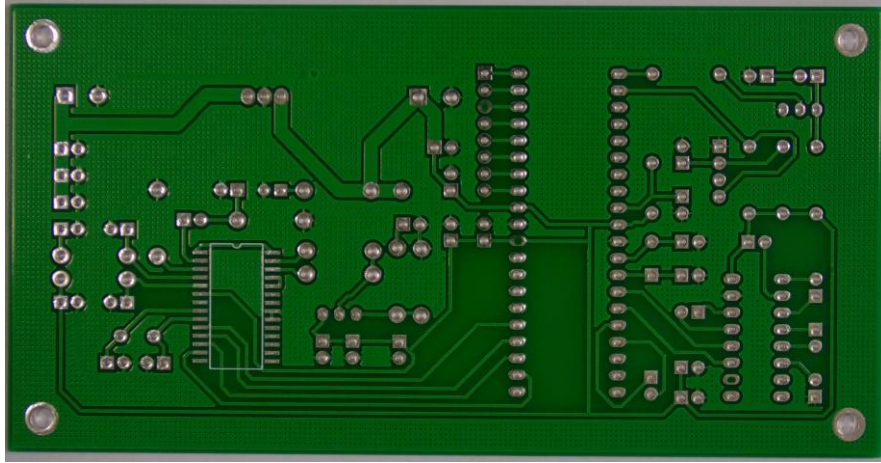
Kaggle PCB sample 01 defective image with a pin hole
